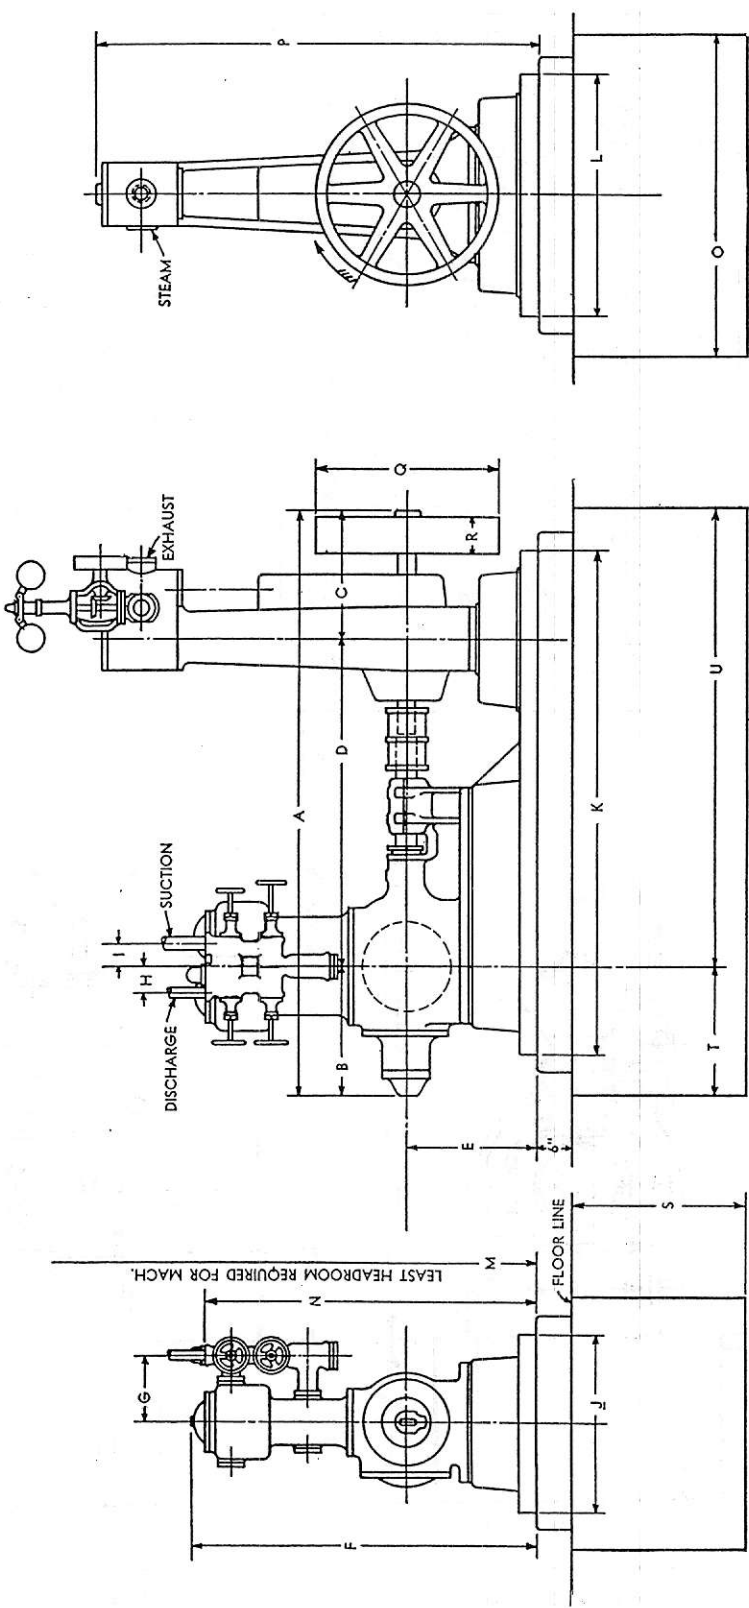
Dimensions, Direct Connected Compressors, Engberg Steam Engine Driven - 6" x 6" to 10" x 10" Inclusive
